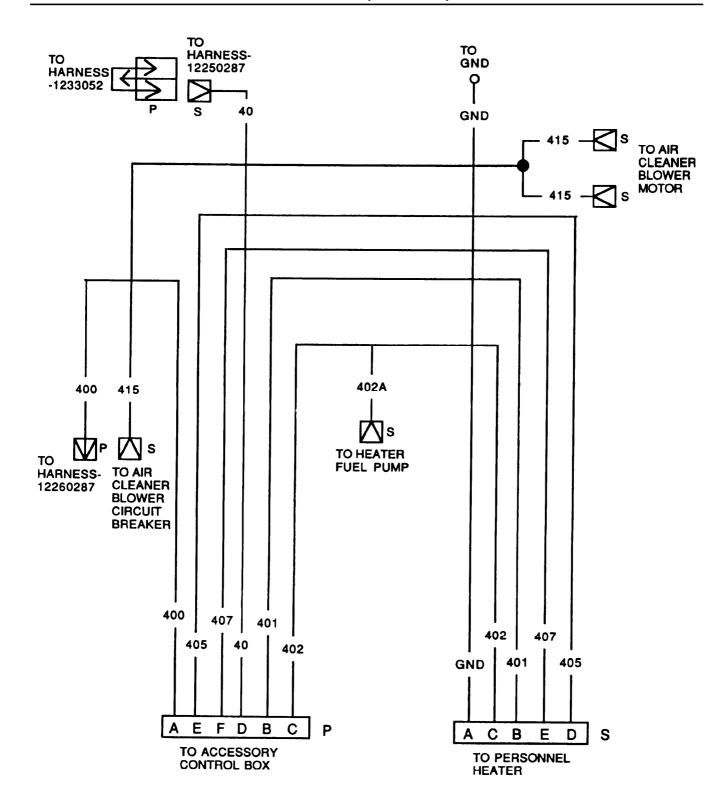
Air Cleaner Blower Wiring Harness (12351544)
